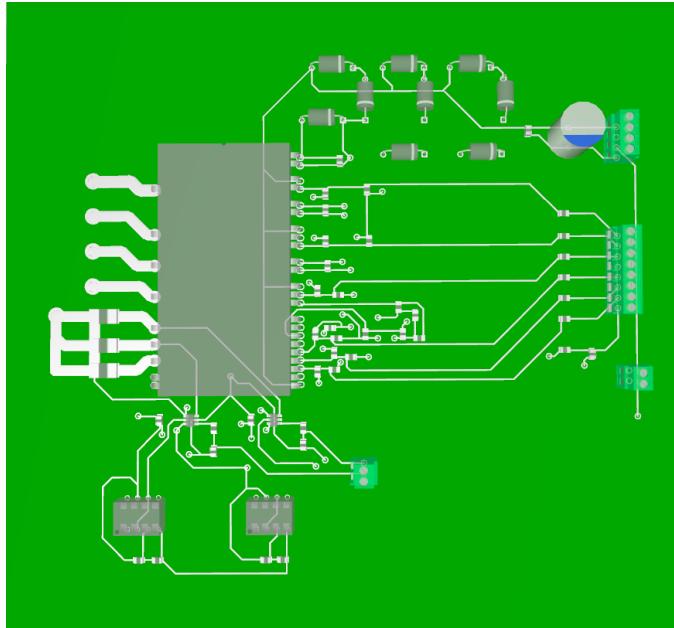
3D View of PCB Layout Design in Ultiboard
